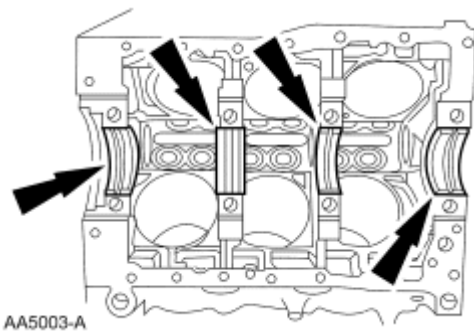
Identifying Crankshaft Upper Main Bearings & Upper Thrust Main Bearing
